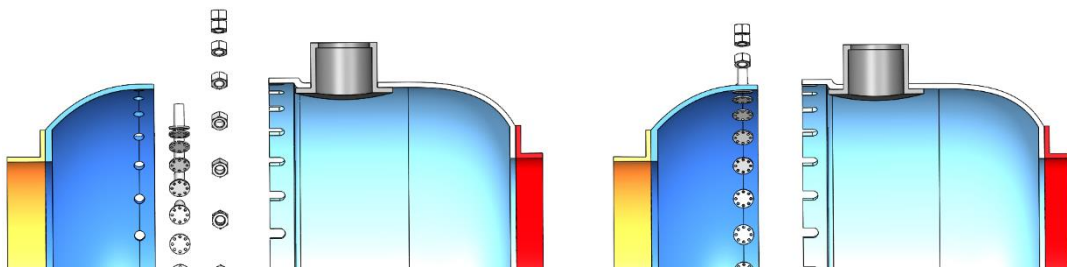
Simplified Assembly view (step 1)    Figure 227 – Simplified Assembly view (step 2)
